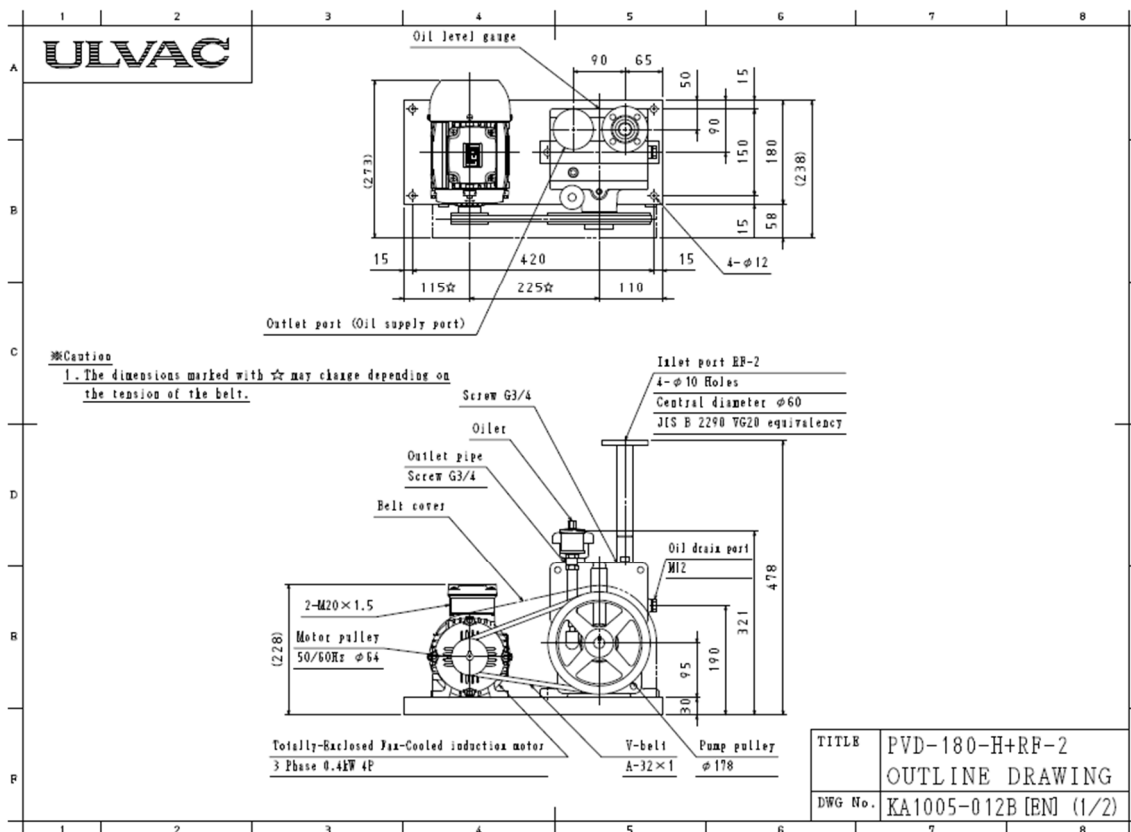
Dimensional drawing PVD-180-H+RF-2
